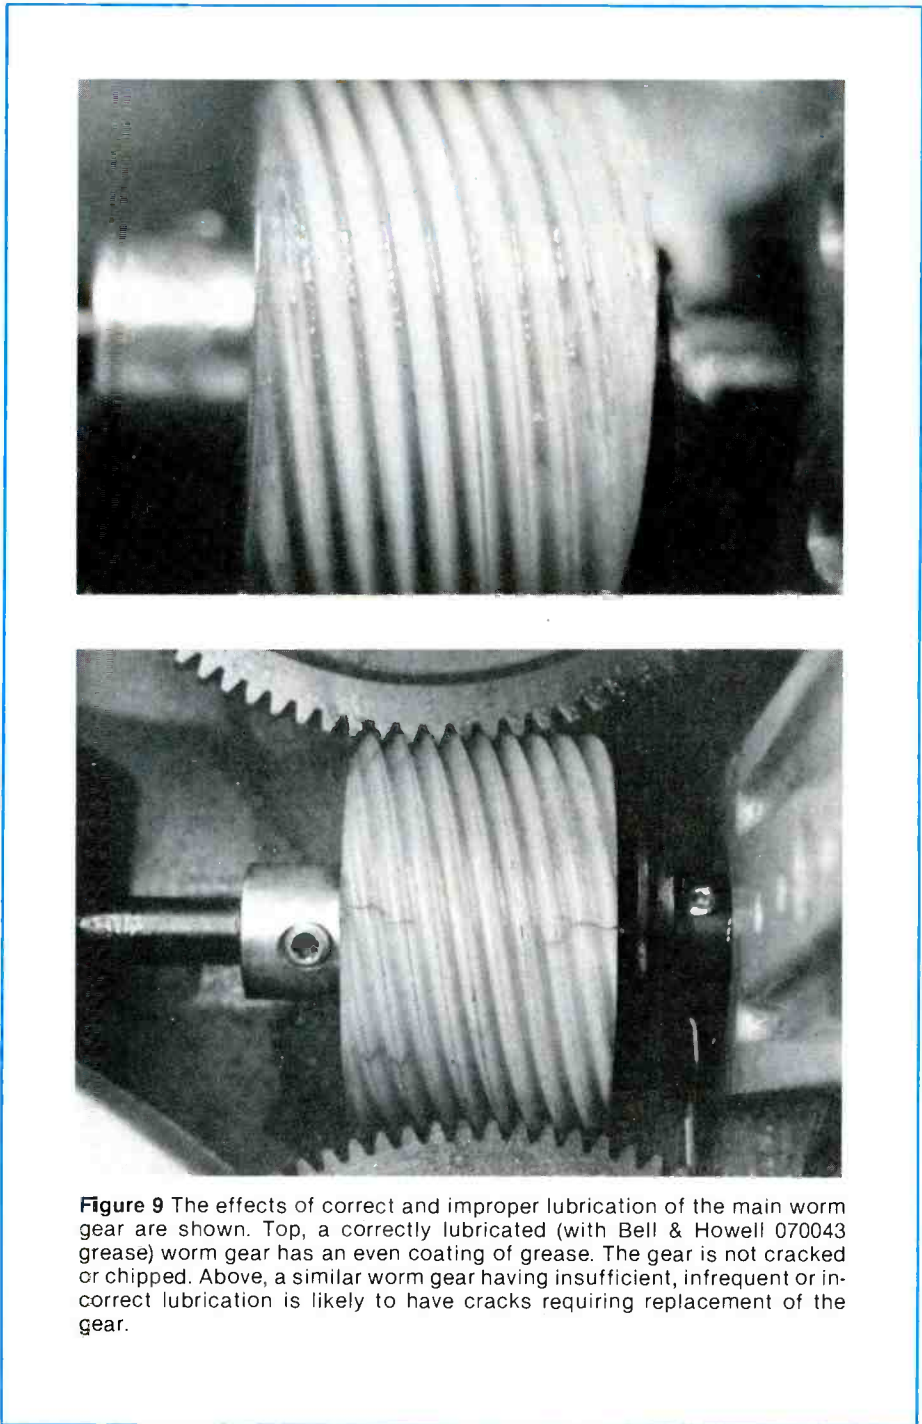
The effects of correct and improper lubrication of the main worm gear are shown. Top, a correctly lubricated (with Bell & Howell 070043 grease) worm gear has an even coating of grease. The gear is not cracked or chipped. Above, a similar worm gear having insufficient, infrequent or incorrect lubrication is likely to have cracks requiring replacement of the gear.
